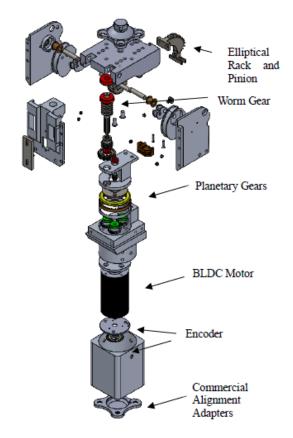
EXPLODED VIEW OF THE KNEE UNIT
